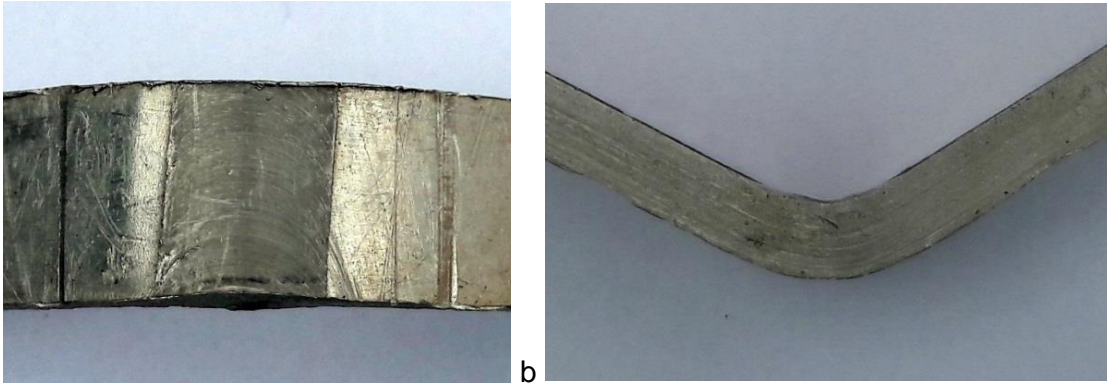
Views of weld 28 after flexural test a) the surface b) the side
